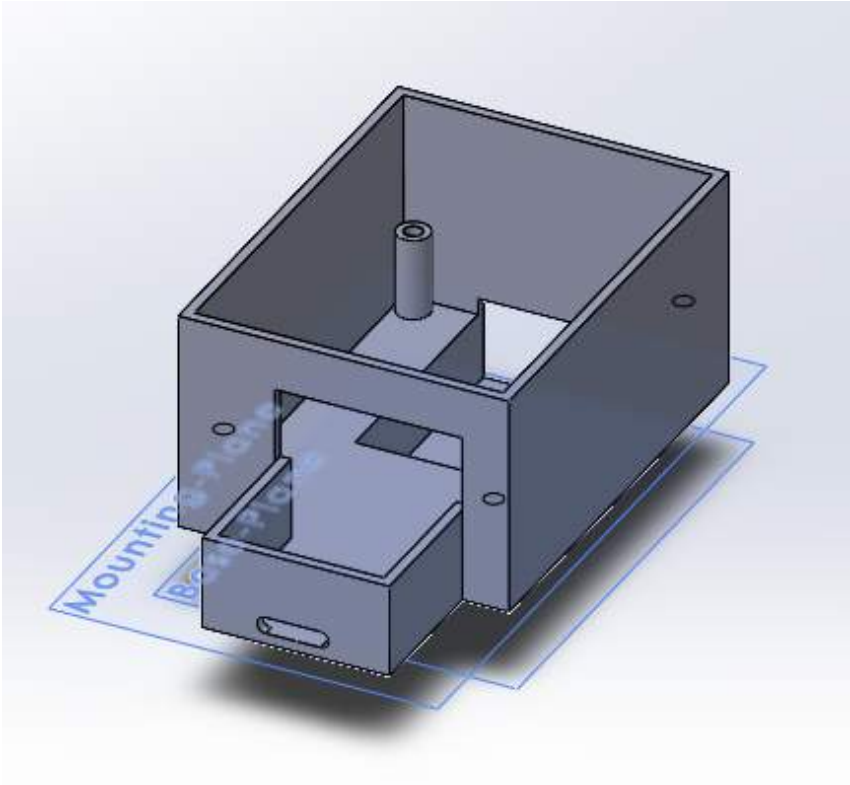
ATEMR: Mobile Base Design - 3D design v2 BOTTOM VIEW
